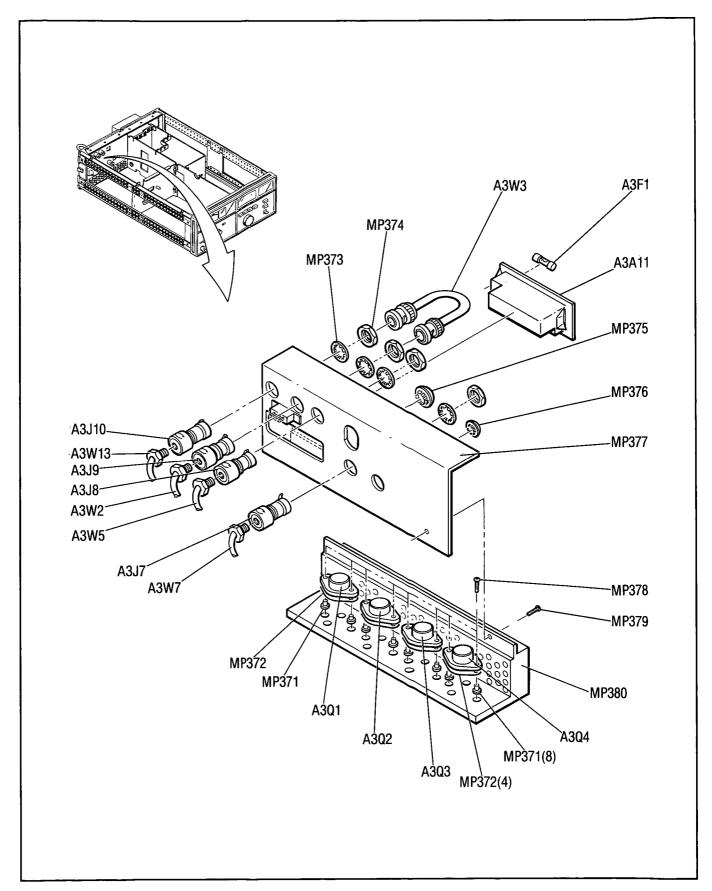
A3 Power Supply and Rear Panel Illustrated Parts Breakdown
